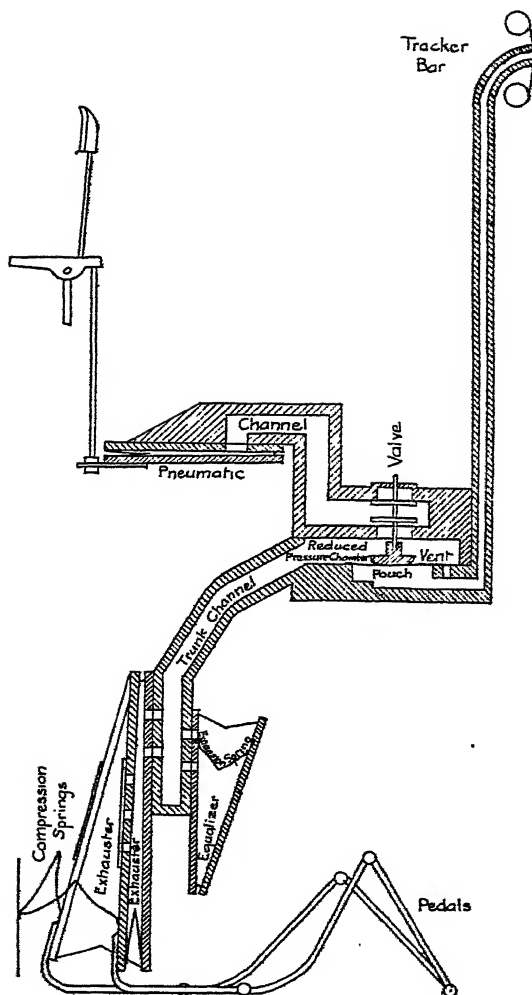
IDEAL SECTIONAL VIEW OF PNEUMATIC MECHANISM;
